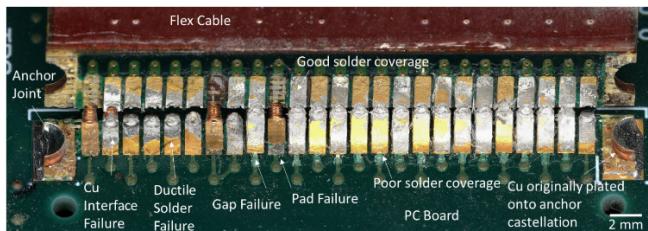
Top view of a flex cable connected to the PCB with castellated via solder joints, after peel testing. This unit was tested in the as-received condition.
